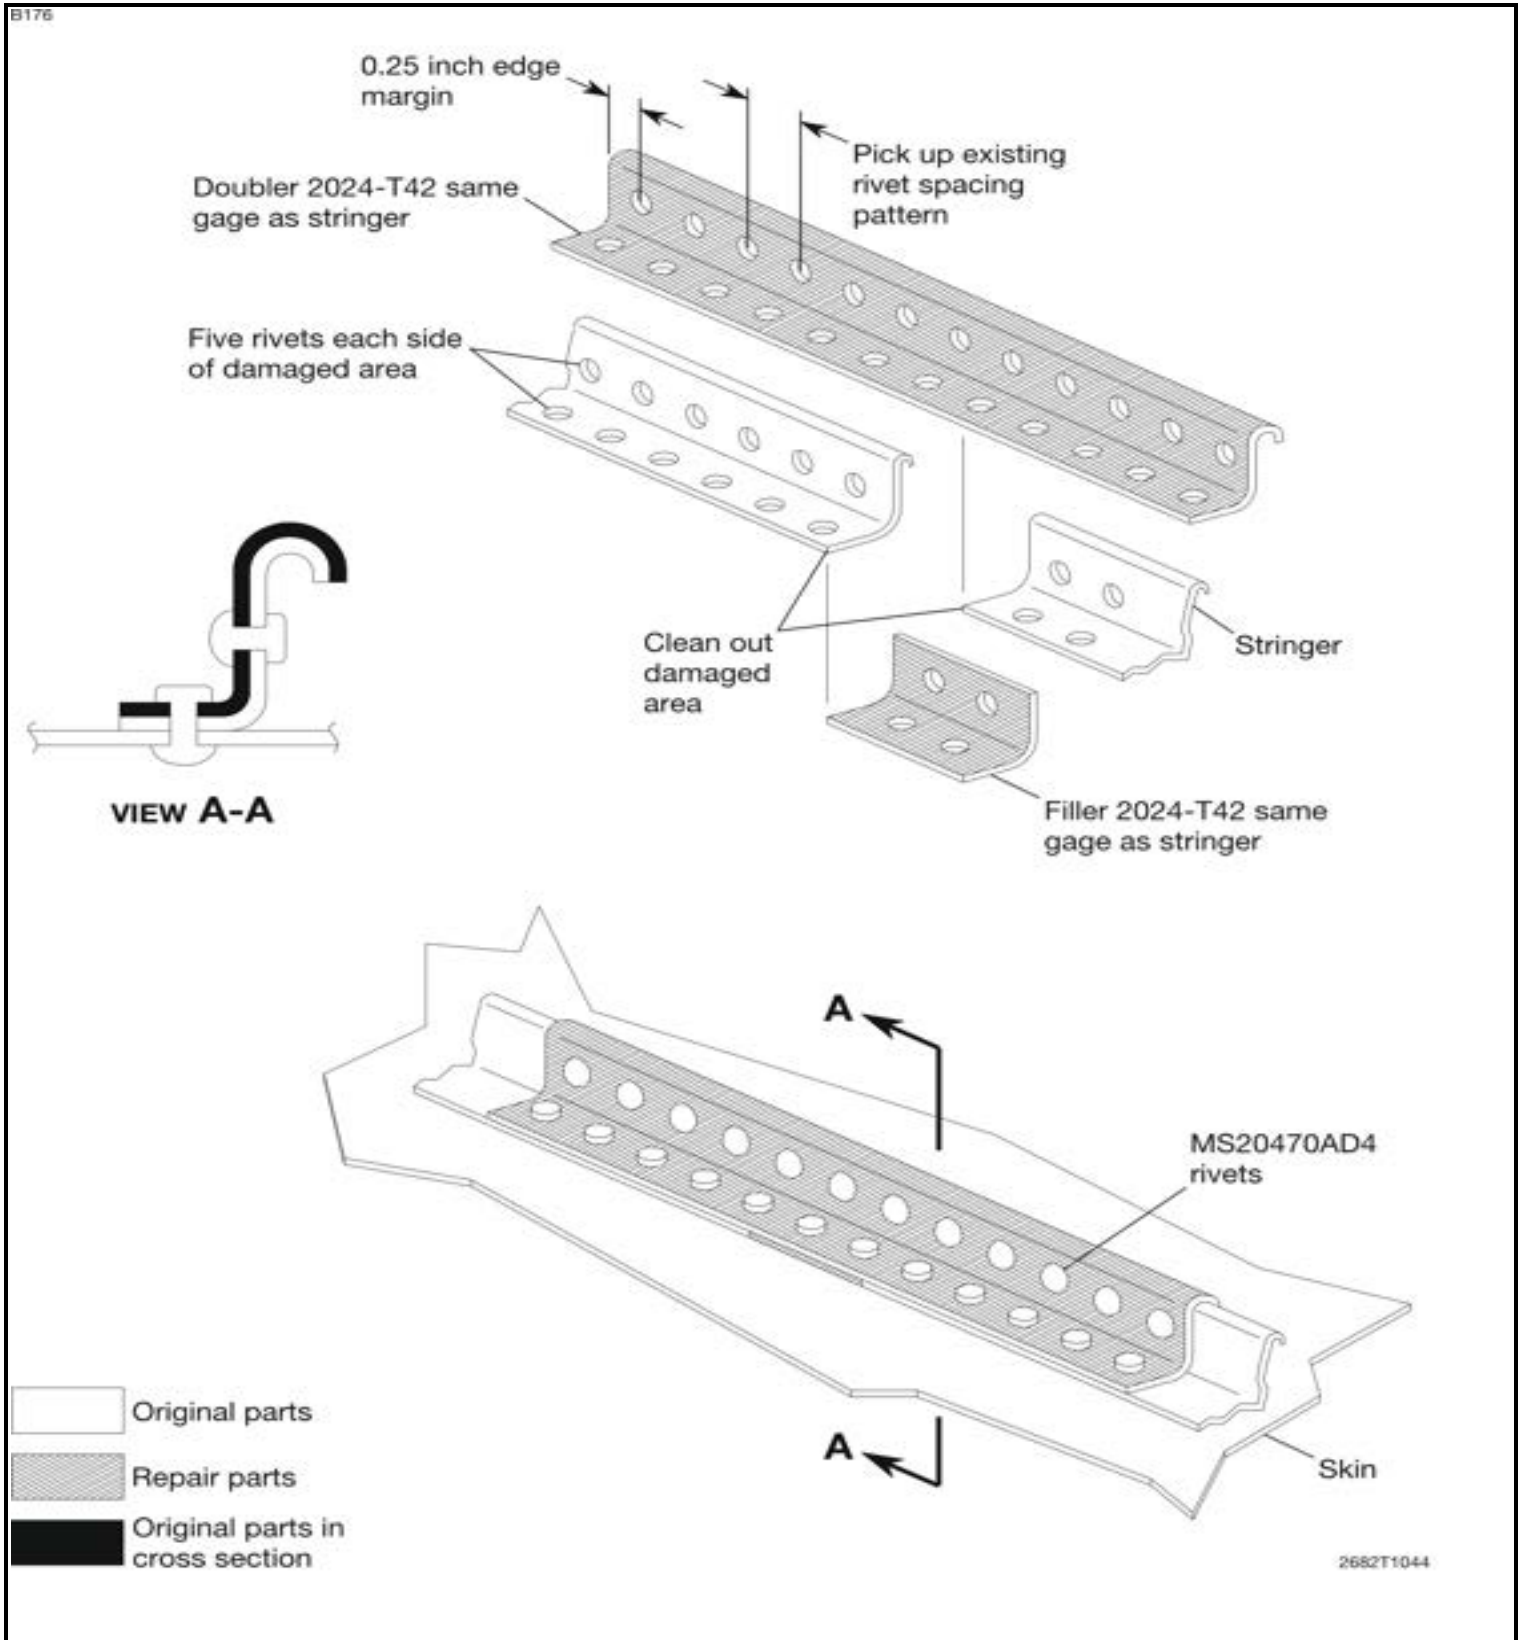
Sheet 2 : Typical Stringer and Channel Repair
